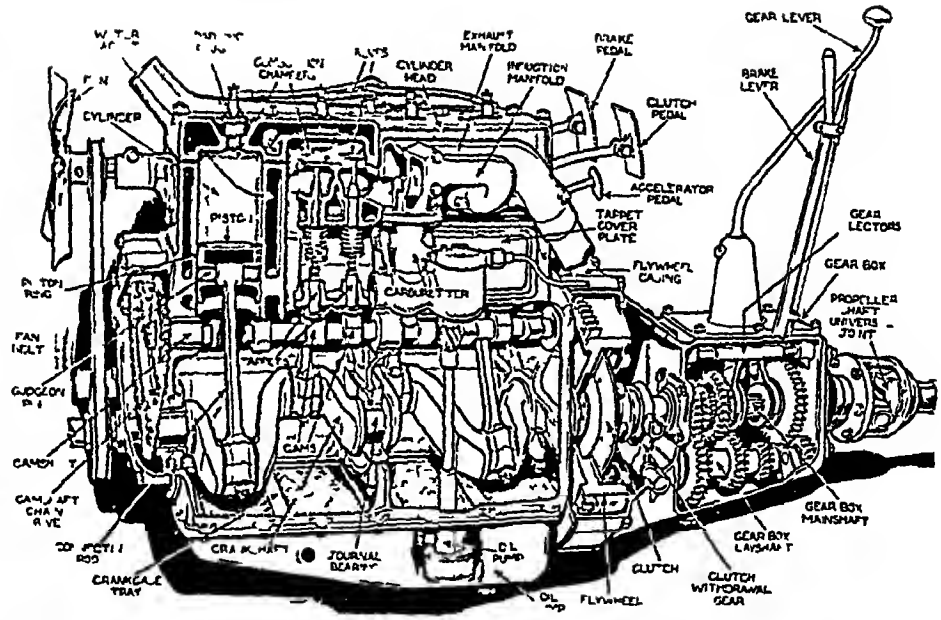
This is a four-cylinder side-valve engine with clutch and gear-box in section. The various parts and components referred to in the article are easily distinguishable. Only the front cylinder is shown completely sectioned.
